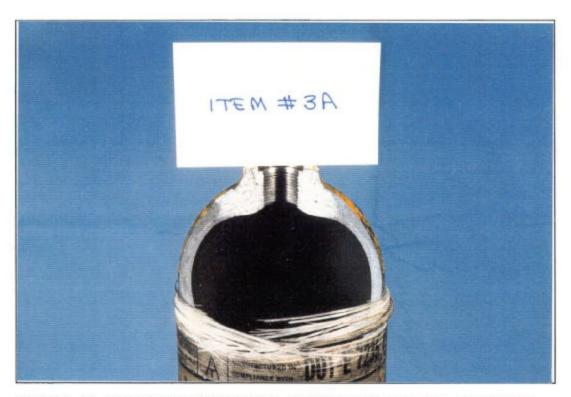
FRACTURE APPEARANCE OF THE HEAD OF THE RUPTURED CYLINDER -- ITEM 3A
